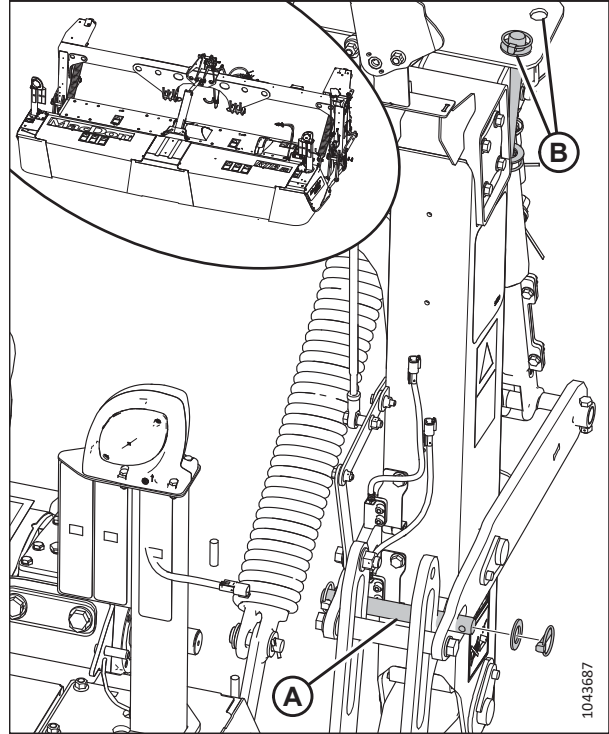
Auxiliary Lift Lock Pins – Left Side
